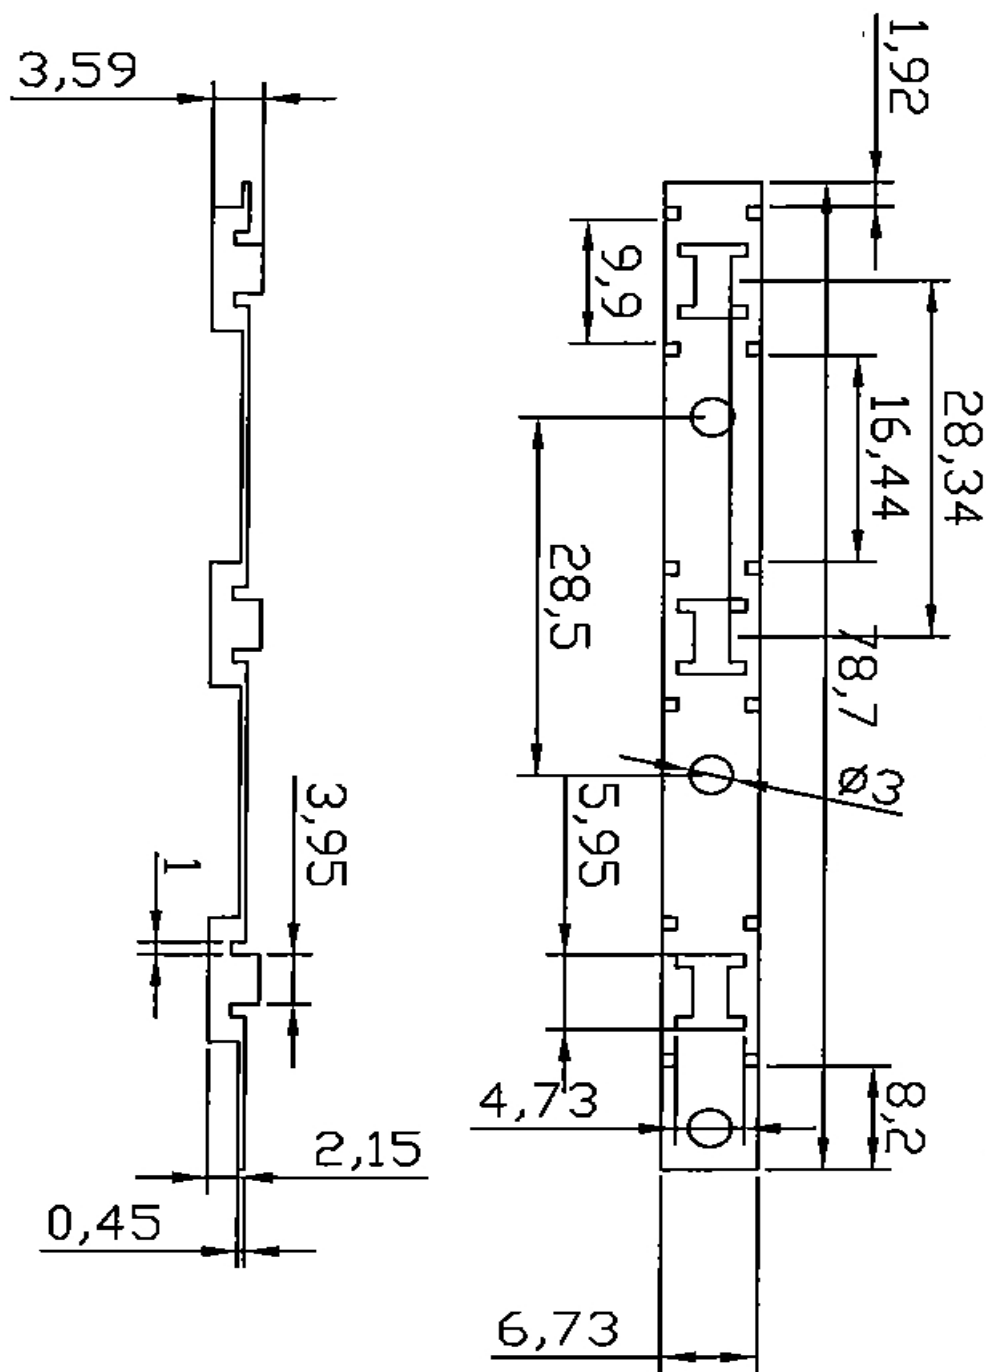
Engineering dimension drawing for line/neutral contact for 130101
